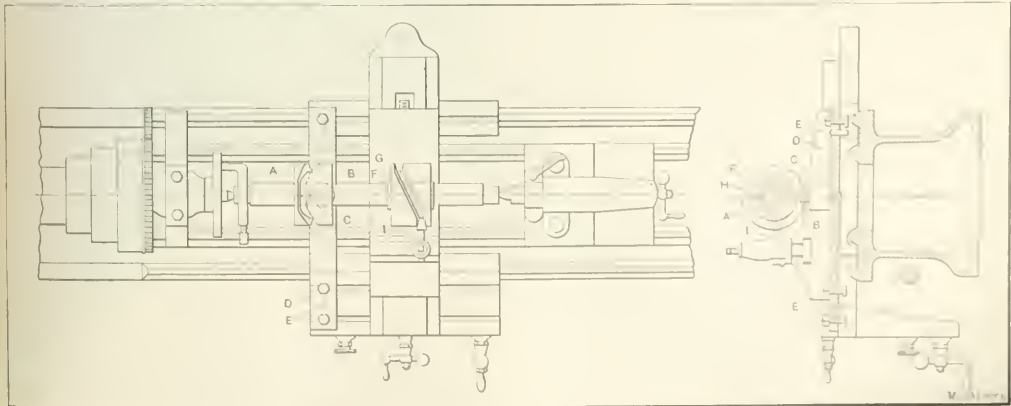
Engine Lathe equipped with Fixture for machining Barrel Cams
